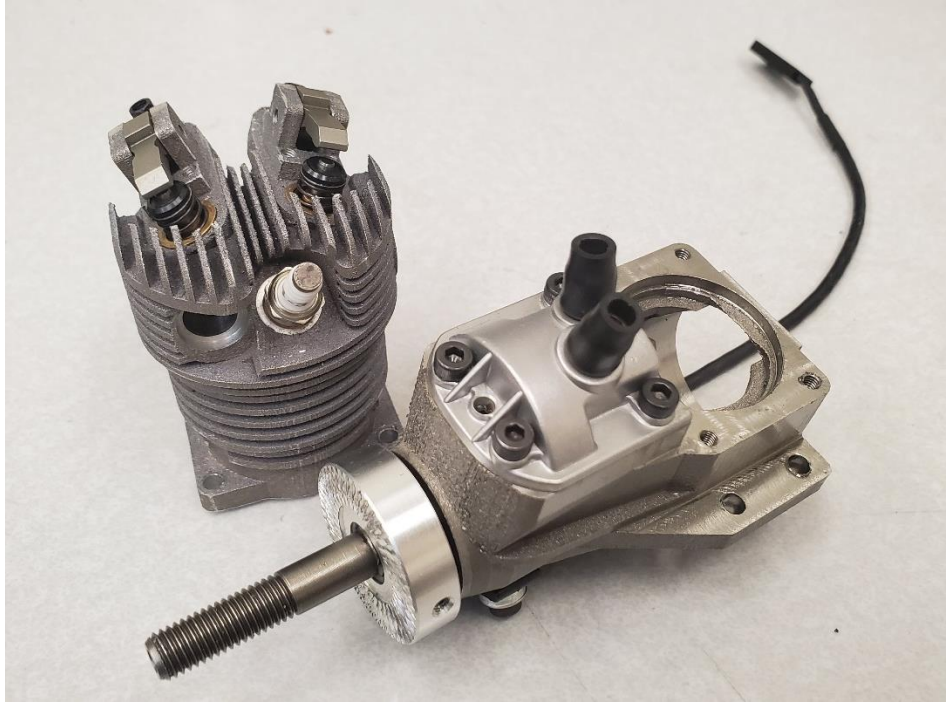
AM cylinder head and crankcase assemblies used during testing
